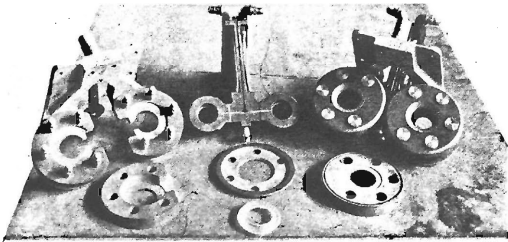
Typical coil and quench assembly for scanning hardening of shafts. (*Westinghouse Electric Corp.*)
